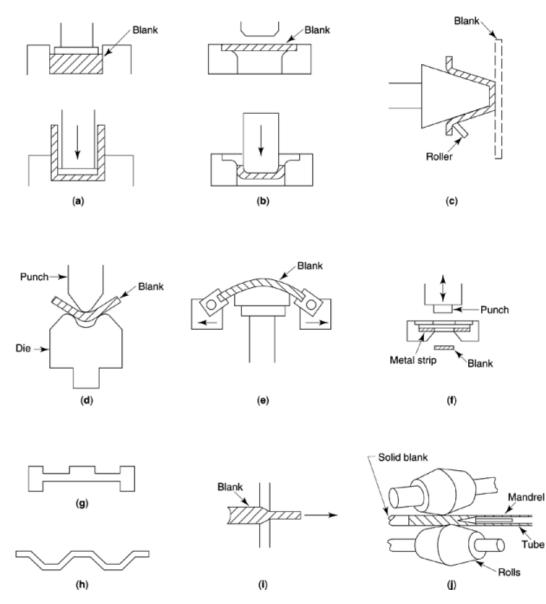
Various forming operations: (a) backward extrusion; (b) deep drawing; (c) spinning; (d) bending; (e) stretching; (f) stamping; (g) coining; (h) embossing; (i) drawing; (j) rotary piercing.
